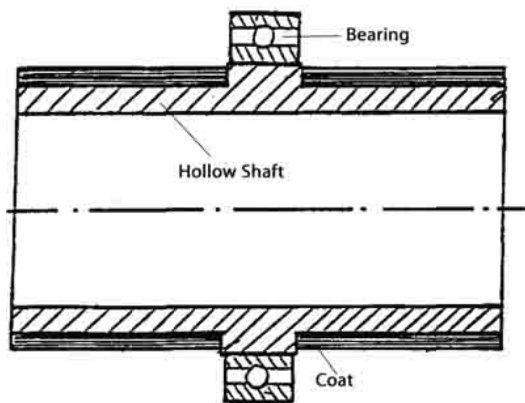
Representation of a hollow shaft with a coat from carbon fiber reinforced epoxy resin and a pressed on ball bearing [11]
